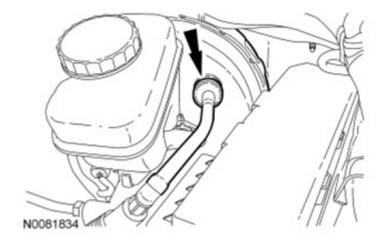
Locating Brake Booster Vacuum Tube Courtesy of FORD MOTOR CO.
